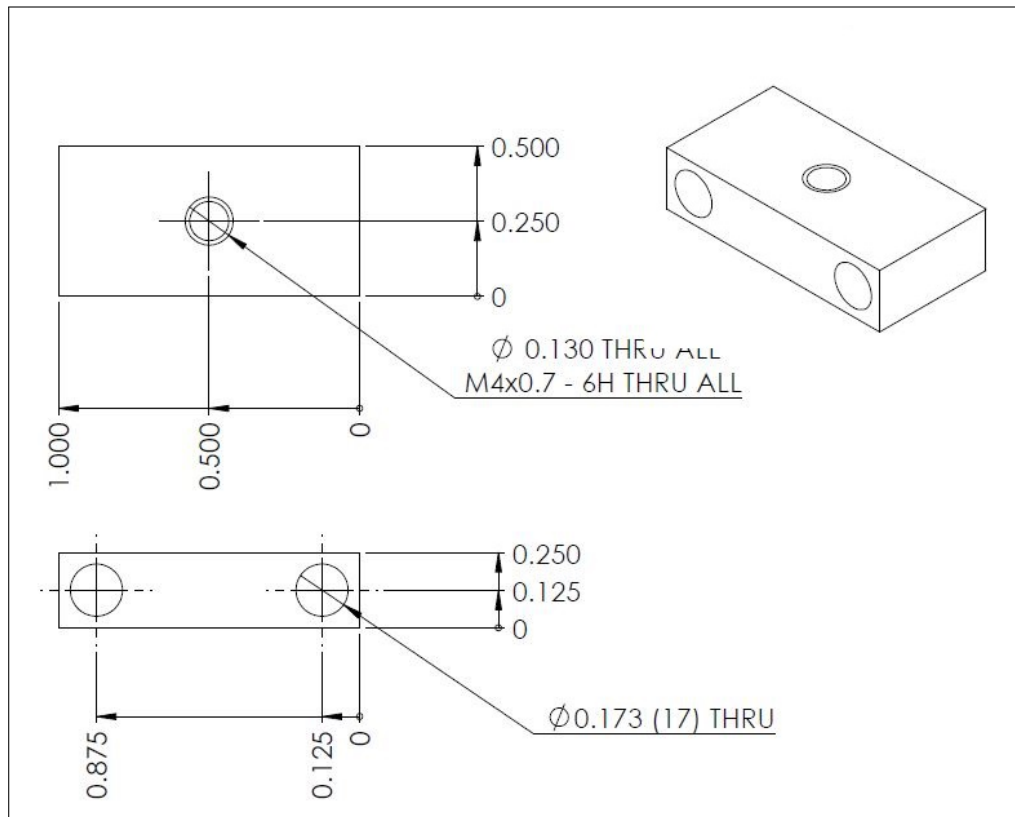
Mobile Base - Pinion Adjust Detail. Material: Aluminum. UNLESS OTHERWISE SPECIFIED, ALL DIMENSIONS ARE IN INCHES.
